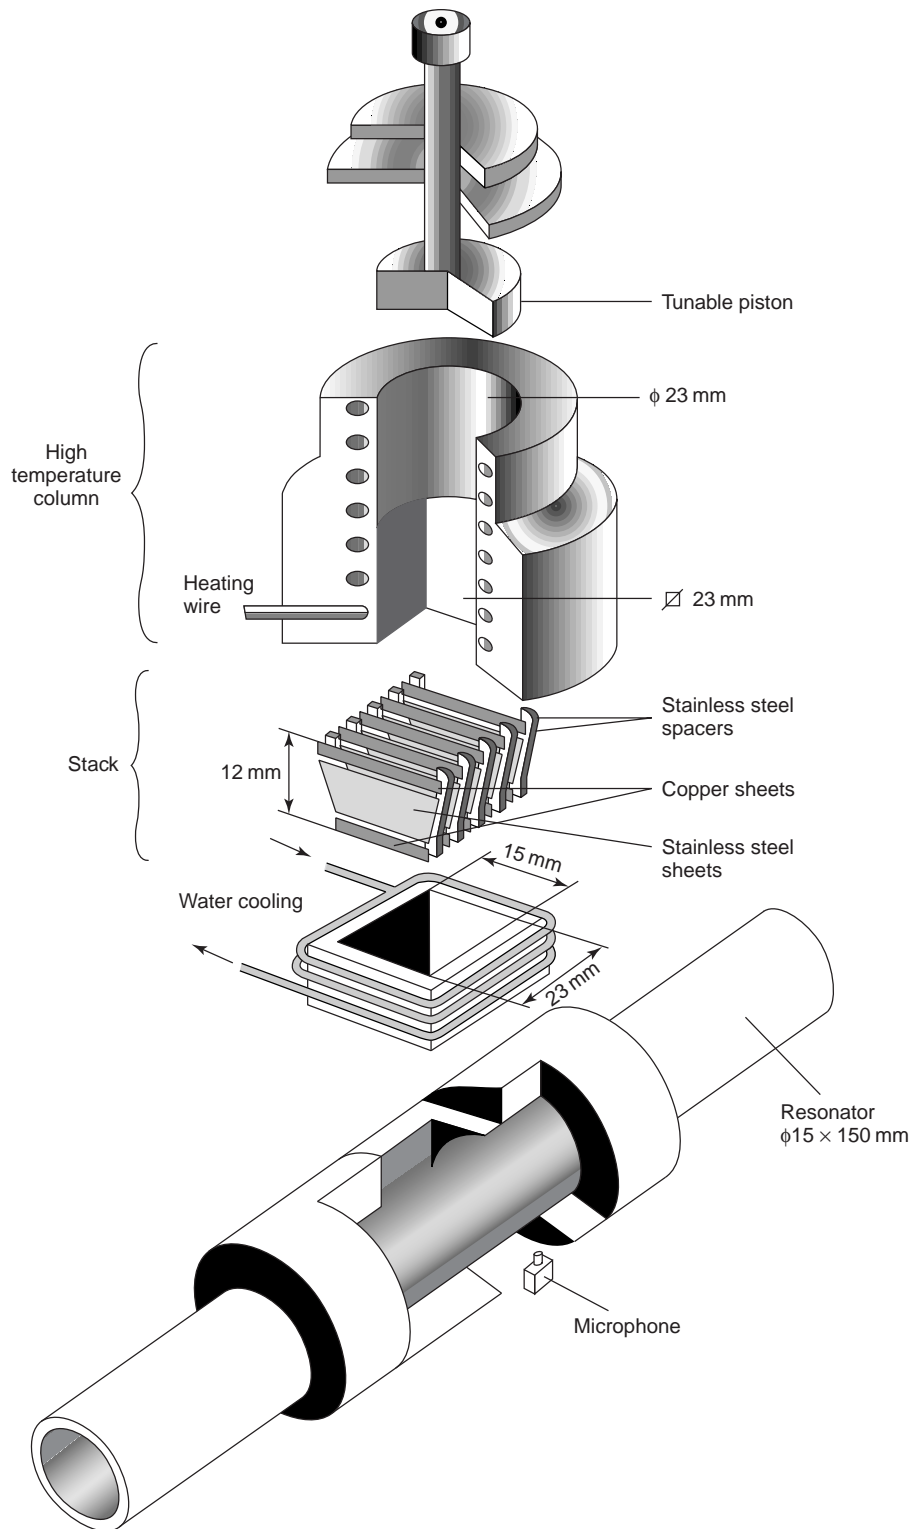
Expanded view of the thermoacoustic stack, dimensions are in millimeters. The tunable piston can slide in the upper part of the column which is cylindrically shaped (diameter 23 mm). The lower part (length 20 mm, square cross-section 23×23 mm) forms the connection to the stack. This part is heated by Inconel wire. The exploded view of the stack shows the stainless steel plates with the temperature gradient and copper plates to maintain the gradient; stainless steel spacers separate the plates. At the connection between thermoacoustic stack and the photoacoustic resonator, a water cooler removes the excess heat and keeps the lower end of the stack at constant temperature. (Reproduced with permission from Bijnen et al.)⁽³⁸⁾
